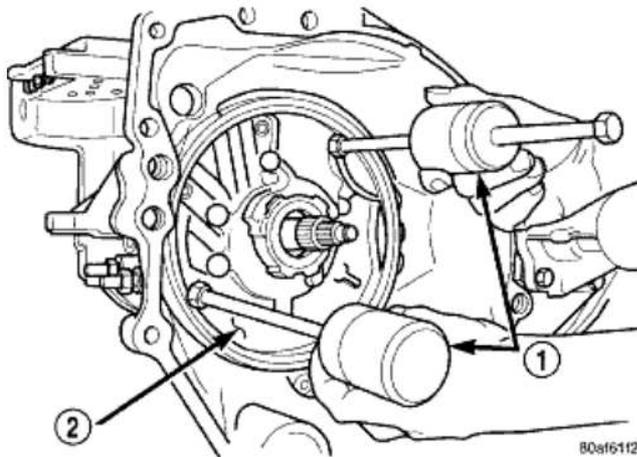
Identifying Slide Hammers C-3752 & Oil Pump
